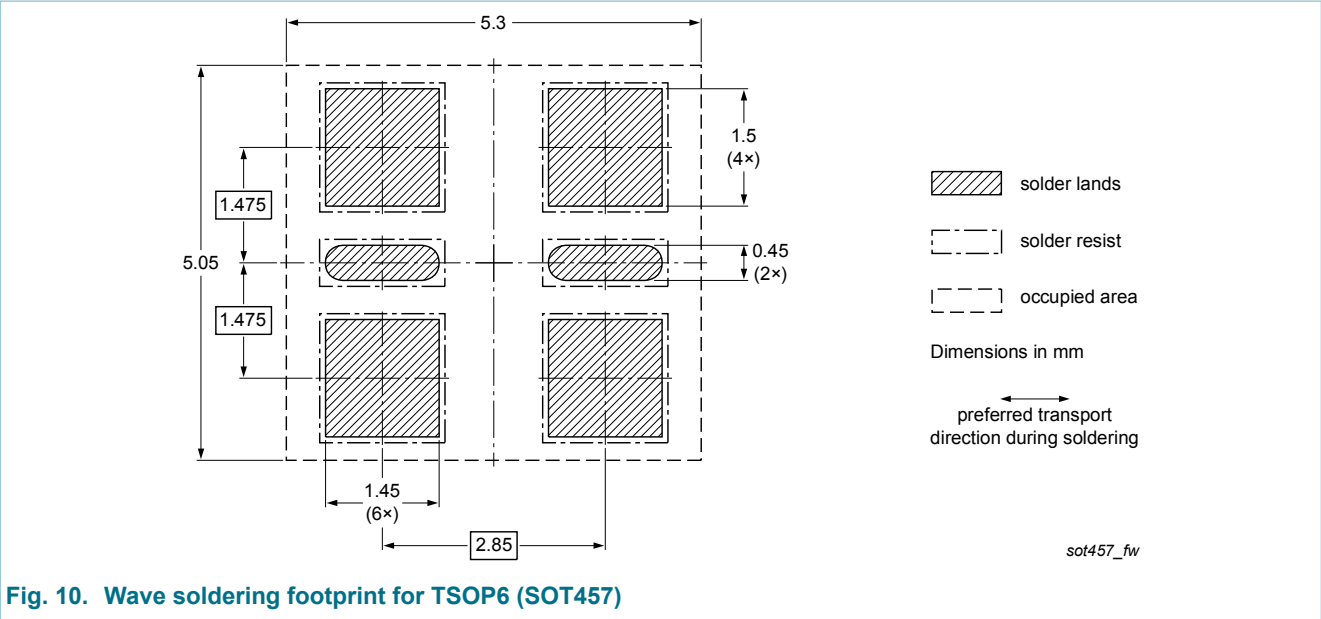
Wave soldering footprint for TSOP6 (SOT457)
